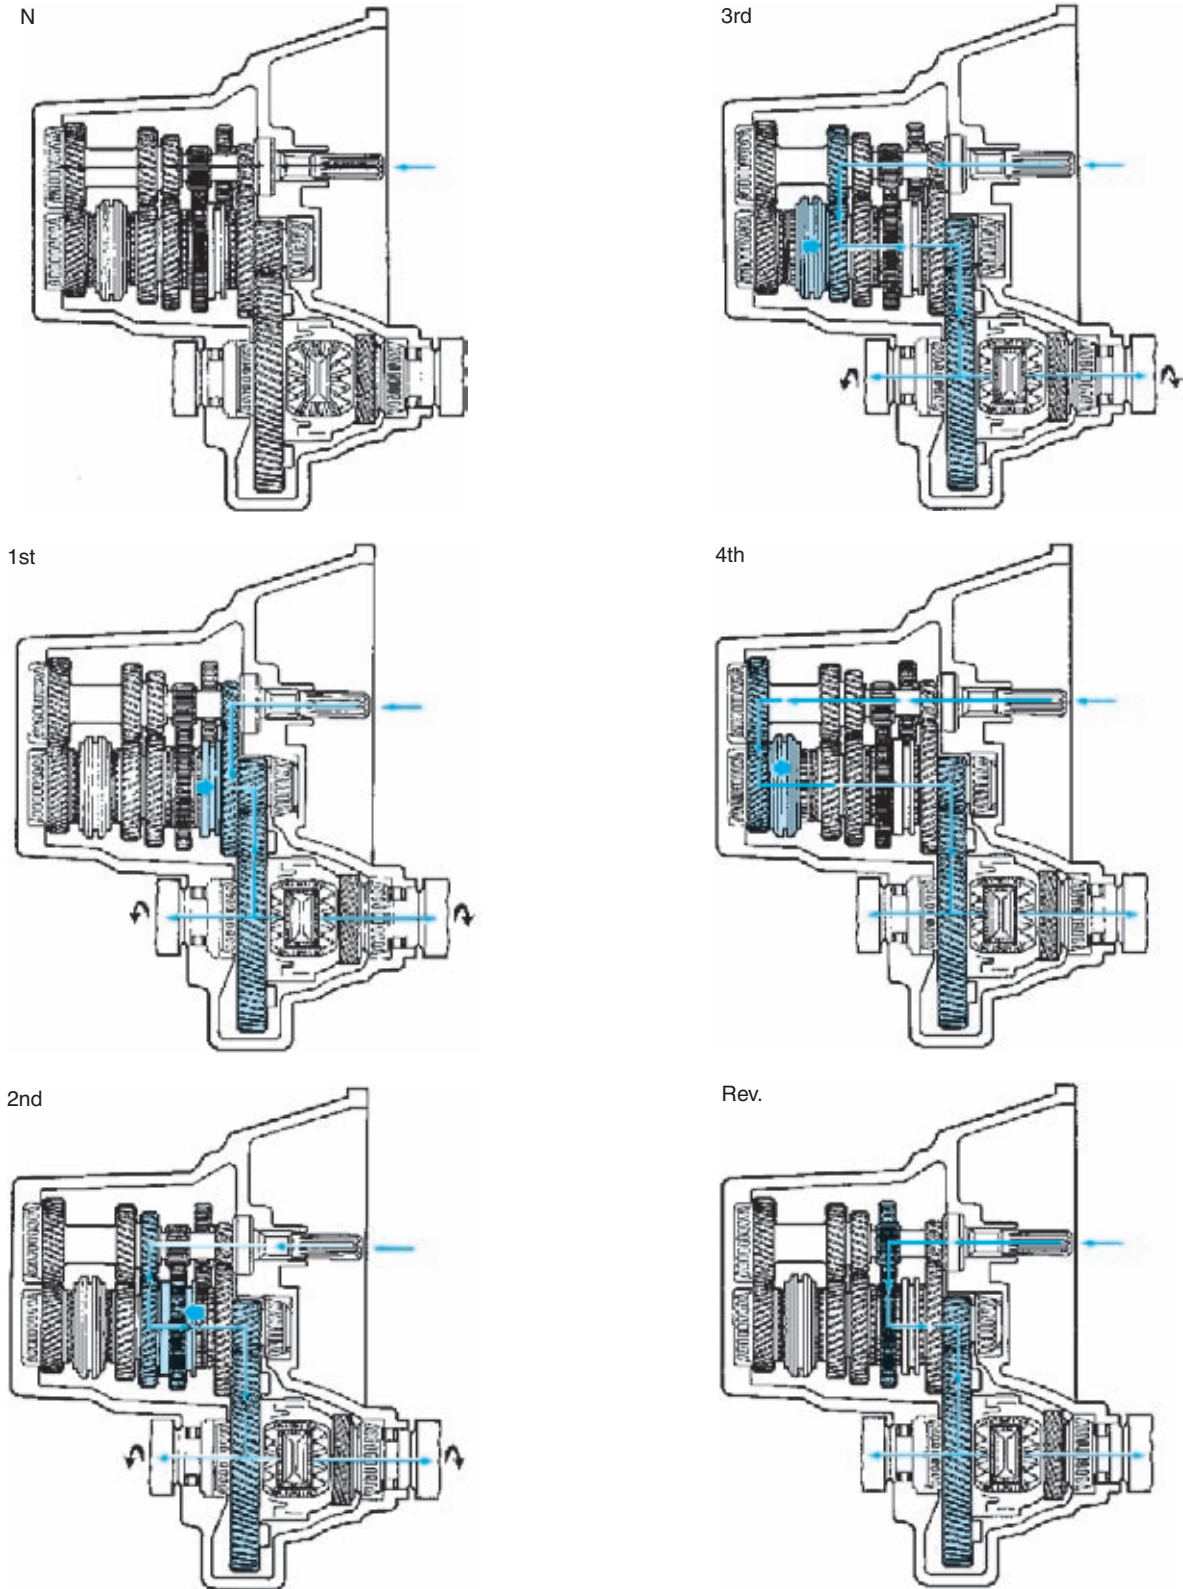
The power flows through the gear set of a four-speed transaxle are shown here. Note how they are similar except for the gear sizes and that, in reverse, an idler is used. (Courtesy of Ford Motor Company)
